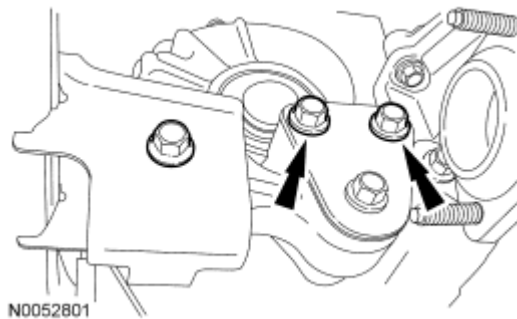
Locating Engine Roll Restrictor Bracket Bolts
